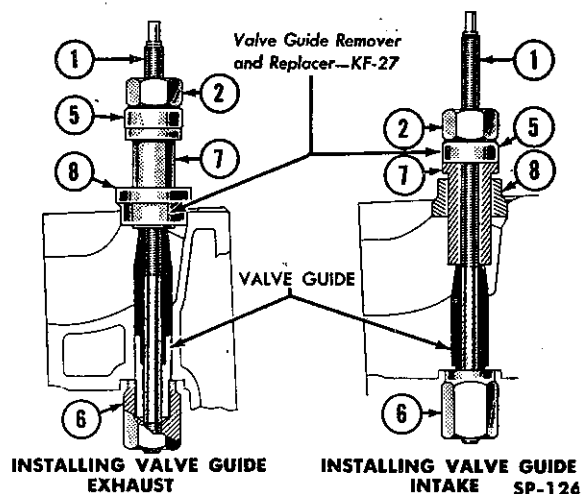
INSTALLING VALVE GUIDE IN CYLINDER BLOCK
